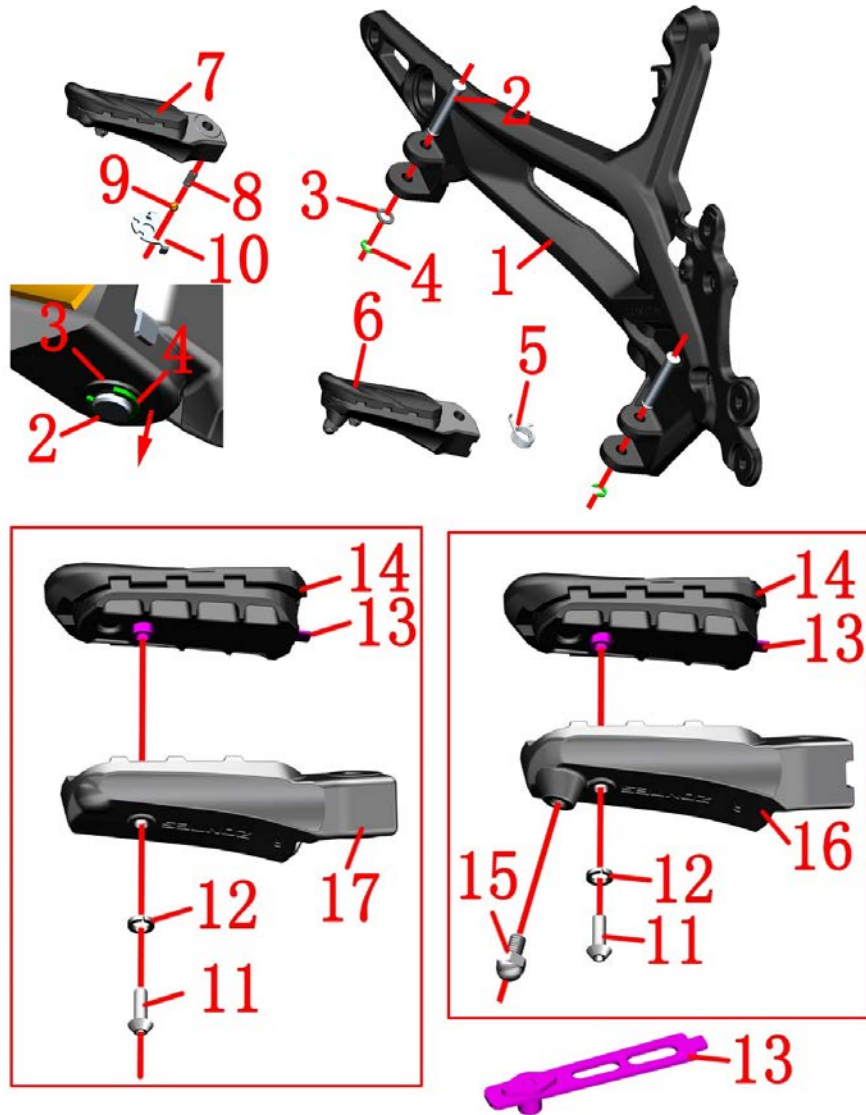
Footrest Assemblies		Right Footrest Bracket Assembly 4	CHK	CAUTION
